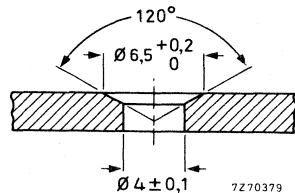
Shape of hole for 500 V insulation, nut fastening
